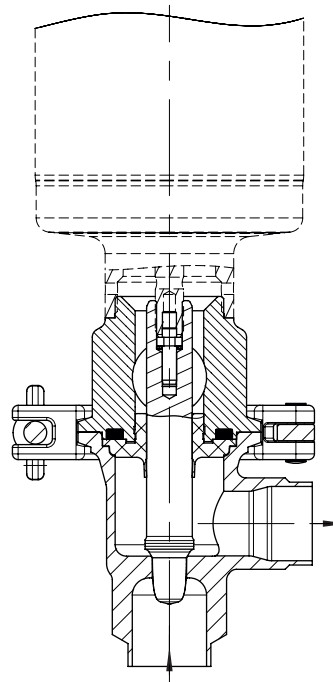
Type 3347/3379 Control Valve with welding ends
